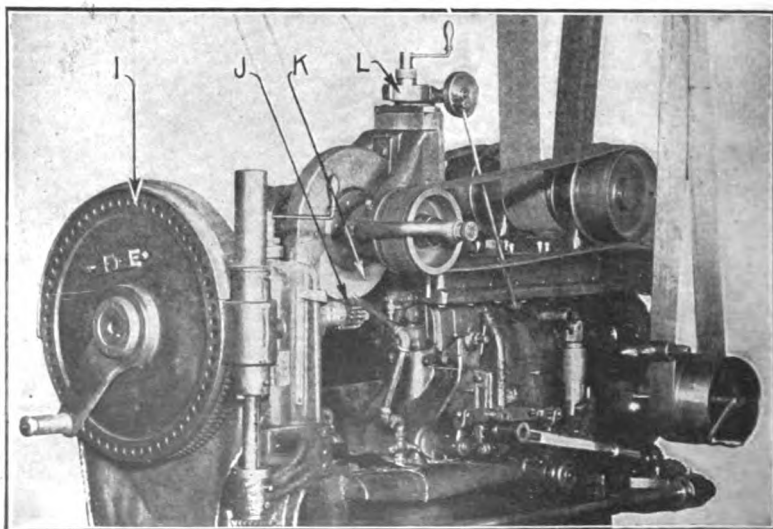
I, indexing wheel; J, gear to be ground; K, grinding wheel entering gear; L, automatic device for feeding wheel down as it wears away.
